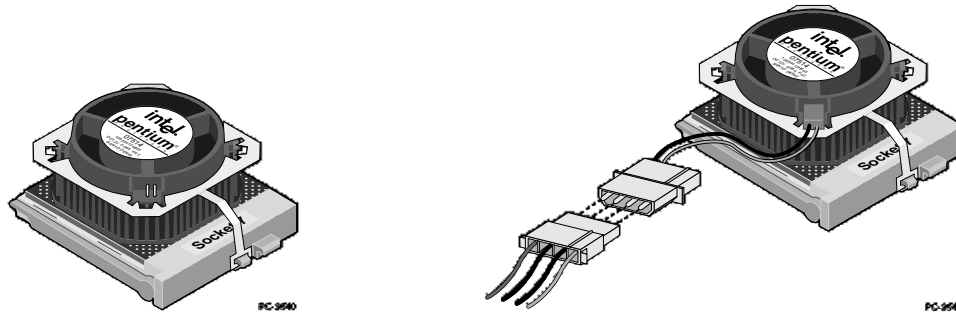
Boxed Pentium® Processor or Boxed Pentium Processor with MMX™ Technology with Fan Heatsink, Clip and Power Cable
